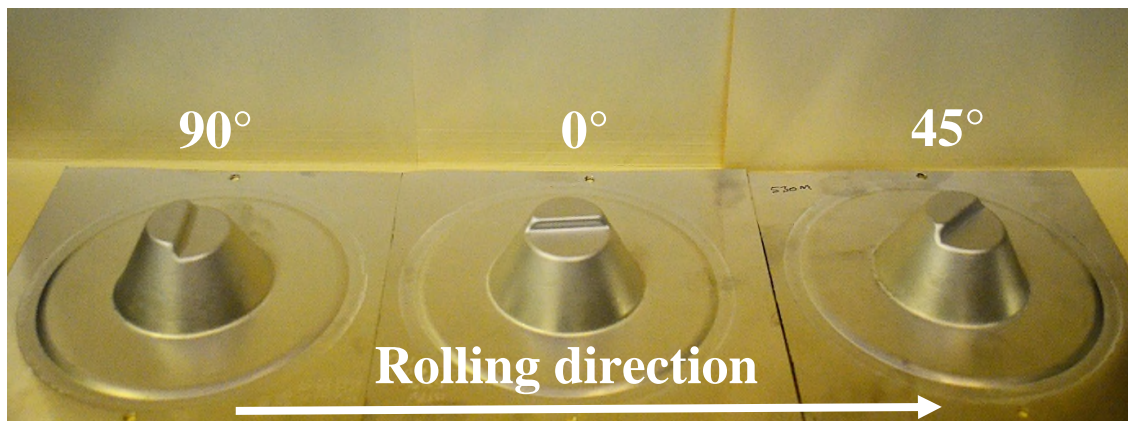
AA7020 Samples after testing at 135Psi and 530°C with varying alignment to tool edge.
